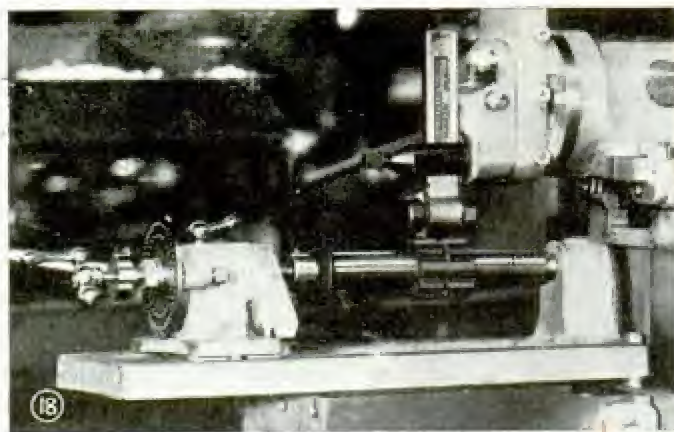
, a set of dividing centers on base plate bolted to shaper table for gear cutting and peripheral grooving
